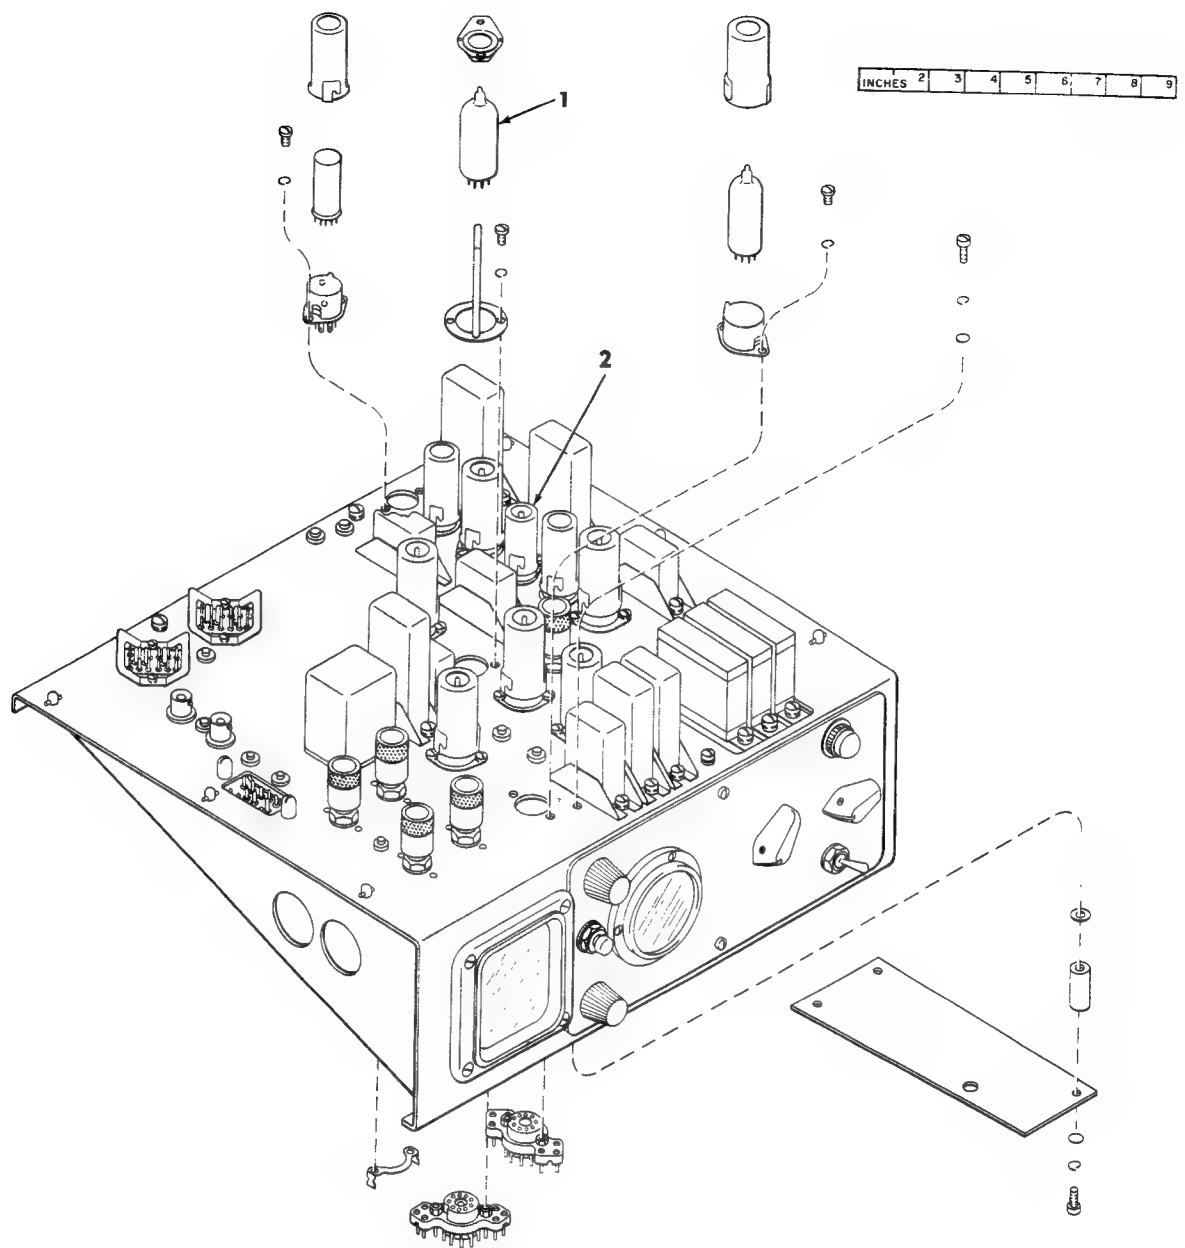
Generator, pulse 0-301/M (8007721)—partial exploded view
